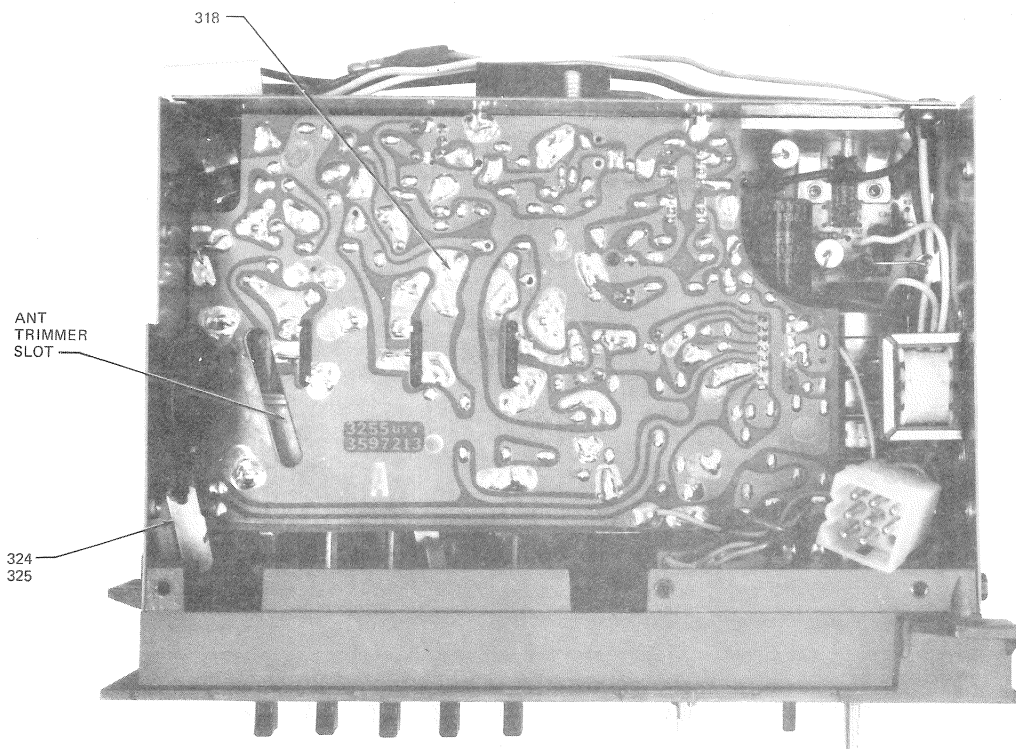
PARTS LOCATION, BOTTOM VIEW (3501458)
